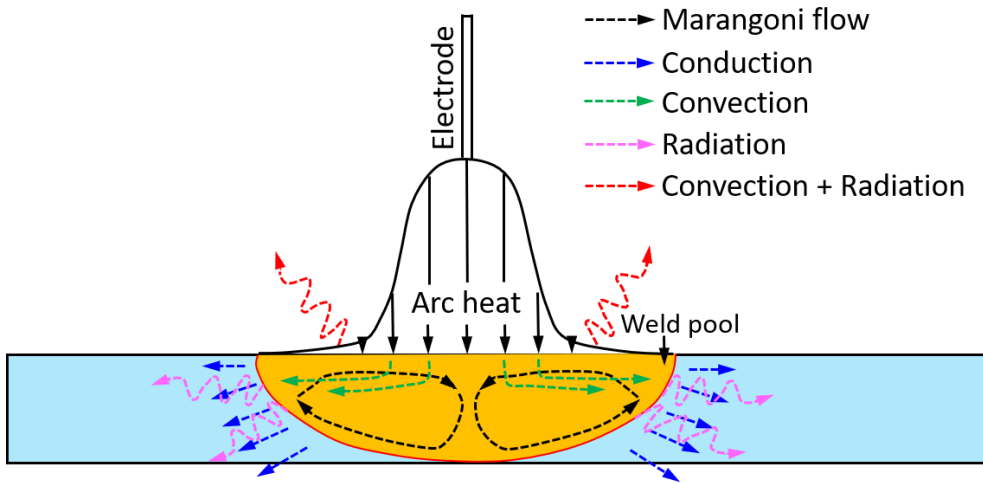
Schematic diagram of heat transfer and Marangoni flow in the weld pool [16].
